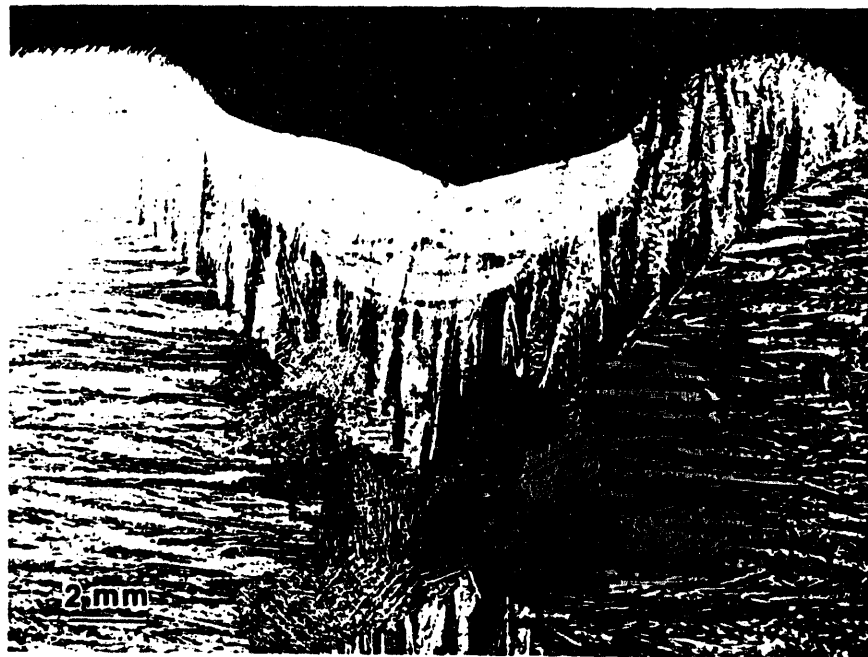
Cross sectional view of GTA weld made in a grooved IC221W casting with IC221W filler metal. Weld contains three individual beads.
